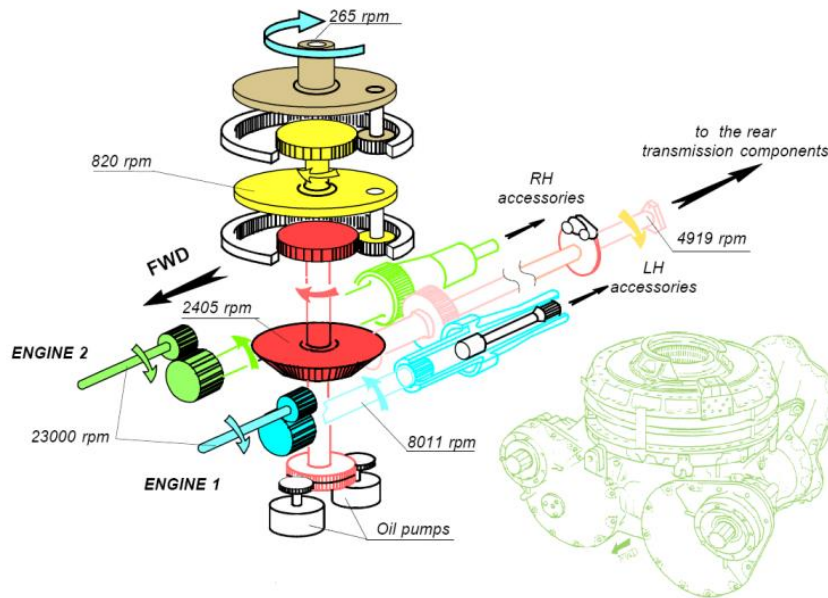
Super puma main gear box drawing reproduced from (G-Redl 2012)
